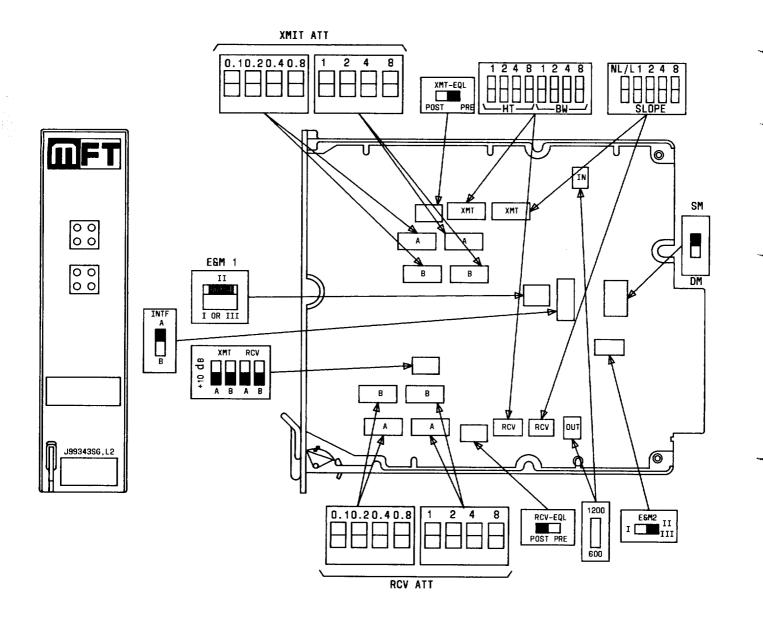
Component Layout of the J99343SG, L2 CFU
